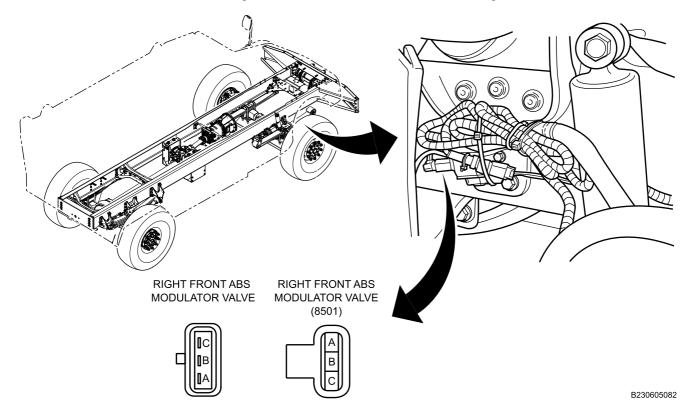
Outboard Frame Rail, Inboard of Right Front Wheel.
